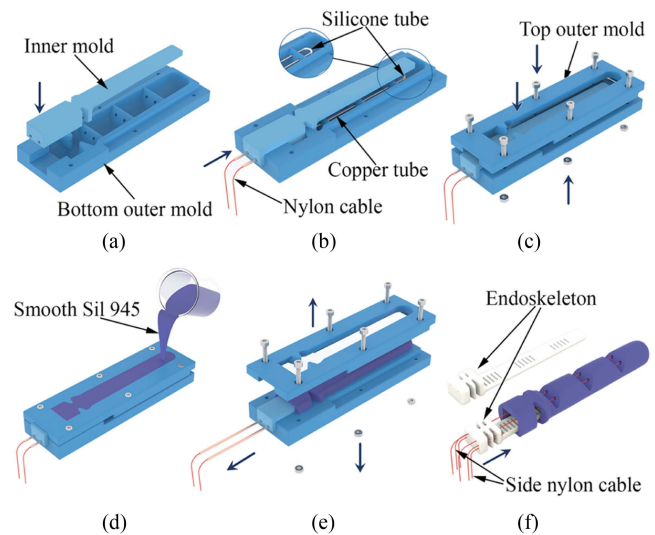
Fabrication process of the cable-driven soft finger. (a) Prepare 3-D-printed molds of the finger body and assemble the inner mold onto the bottom outer mold. (b) Insert two metal tubes through the assembled mold with a soft silicone tube connecting them, and a single nylon cable is routed through both metal and silicone tubes. (c) Assemble the top mold and screw the nuts and bolts to secure all molds together. (d) Cast uncured Smooth-Sil 945 material into the assembled mold; the finger body forms after a 6-hour curing period. (e) Pull out the two metal tubes, unscrew the nuts and bolts, and remove the top mold and inner mold, leaving the nylon cable routed along the finger body and the silicone tube inside the fingertip. (f) 3-D-print an endoskeleton for the soft finger based on soft material (TPU 95A), then insert the endoskeleton into the finger body and route three nylon cables through it.
